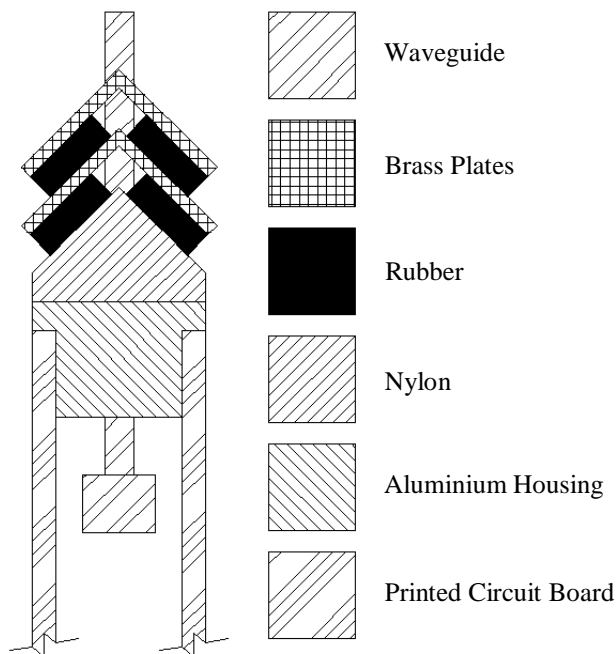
Cutaway view of the piezoelectric impact sensor array showing the layers of anti-vibration shielding
